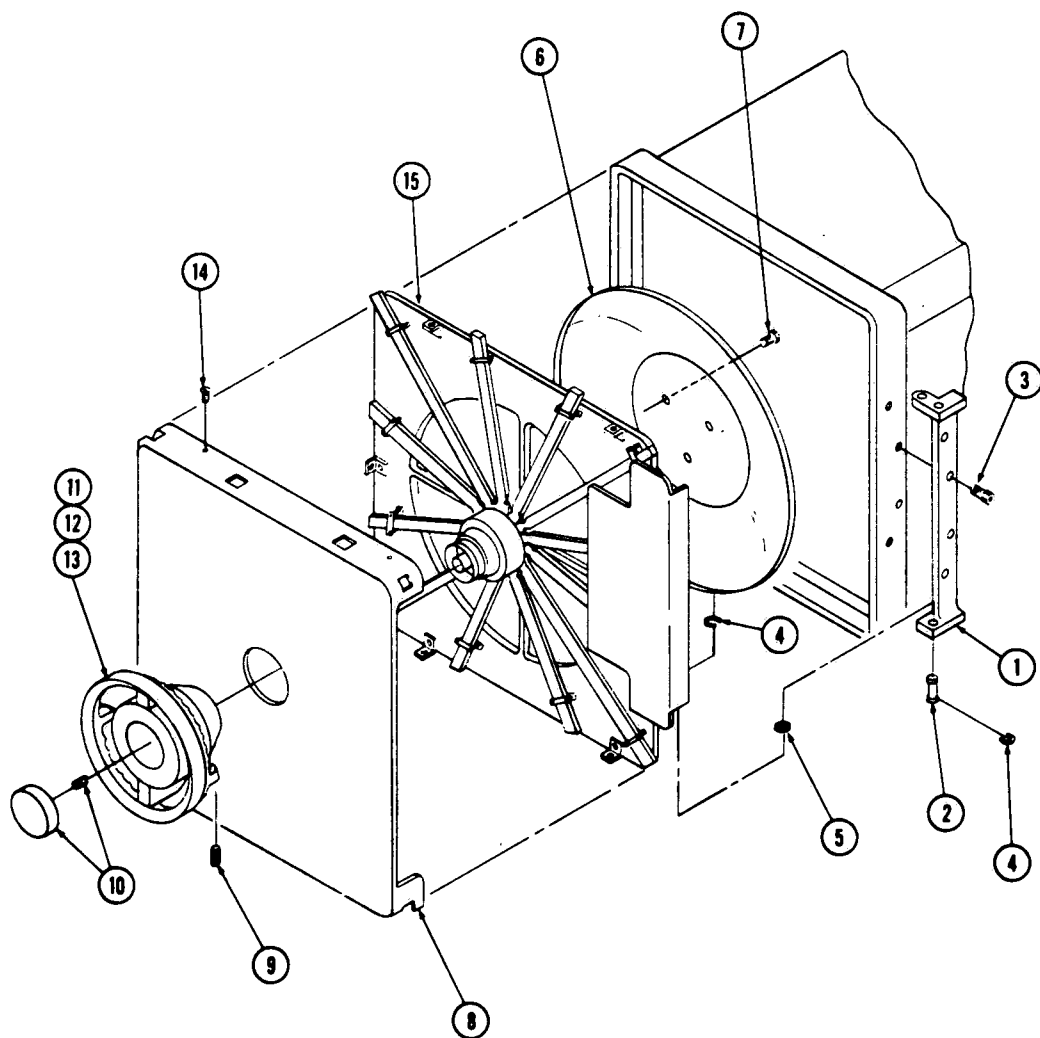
DOOR COVER AND HANDWHEEL ASSEMBLY
